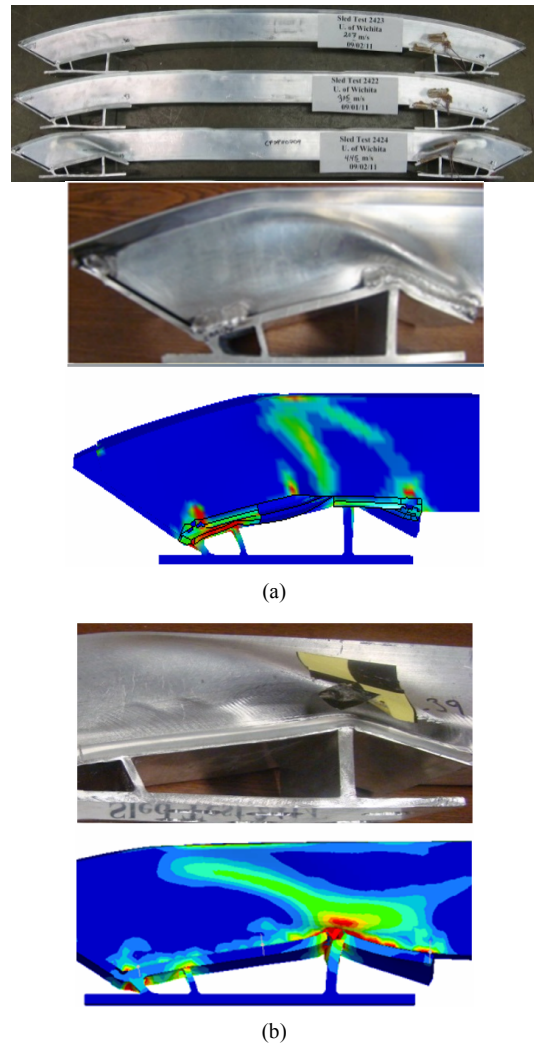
Post-crash comparison study of the damage zone: (a) GMAW weld joints; (b) FSW weld joints.
